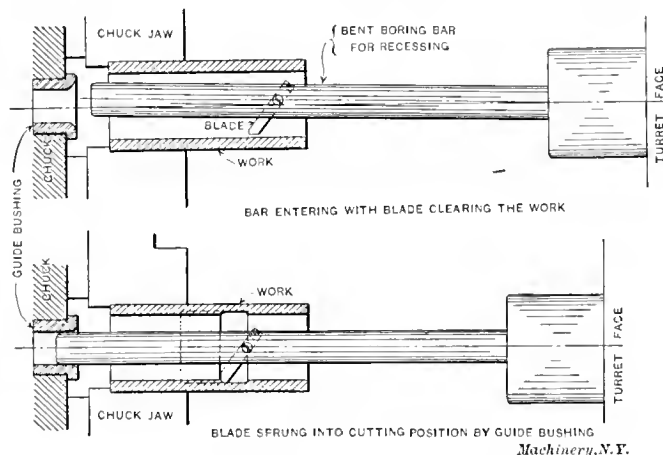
The Tool used for Recessing the Work; shown also in Fig. 3.
